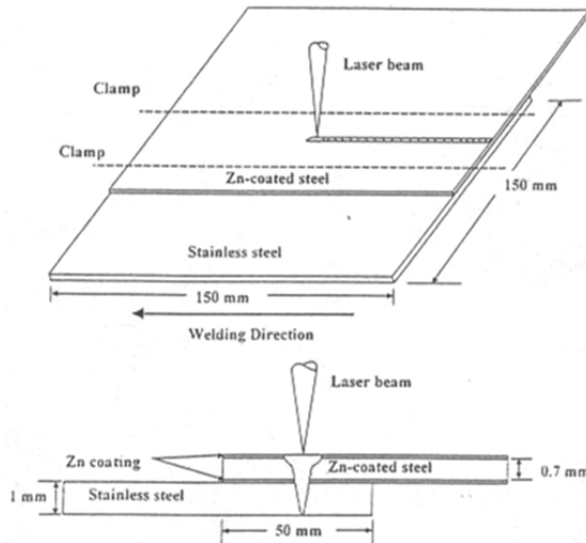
Configuration of the used laser lap weld specimen.
